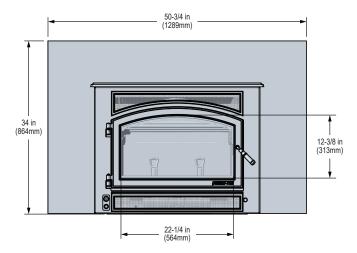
Front View with Large Flat Surround (SP2-5134)
